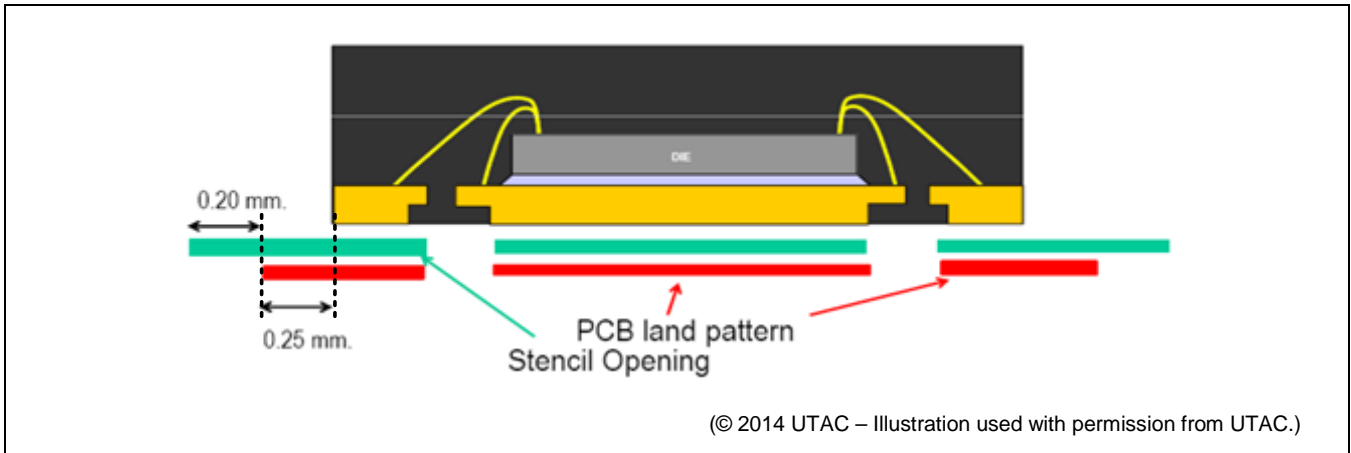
illustrates a suggested footprint for PCB designs using the ZSSC4151 QFN24 (4x4mm) package.
